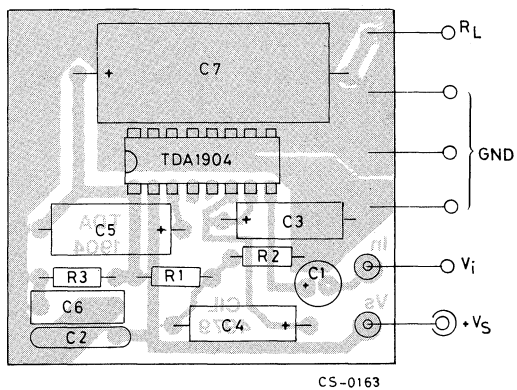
P.C. board and components layout of fig. 1 (1 : 1 scale)
